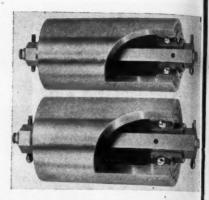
Mathews 4½-In. Diameter Roller with Type 63SB Bearing for Roller Conveyor. Fig. 2—Type 105SB Bearing for Roller Conveyor.
